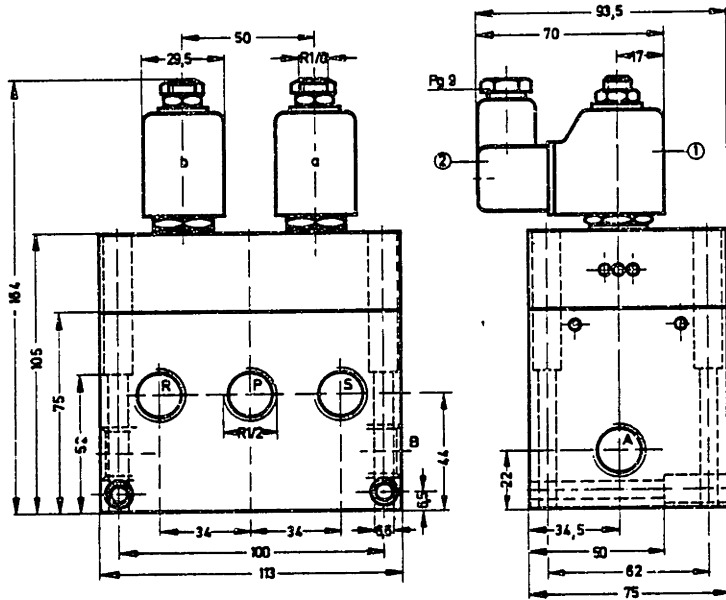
Dimensions of the FESTO 4861 Mc-5/4-1/2 Valve [32]
